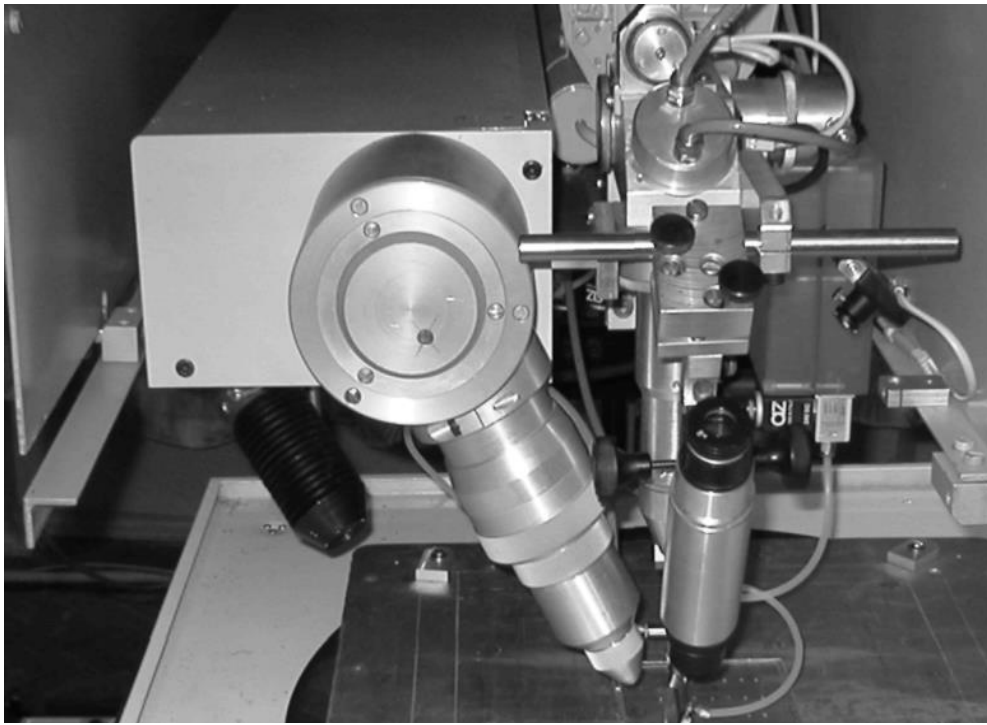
Overview of the operating area of the laser beam machine equipment
